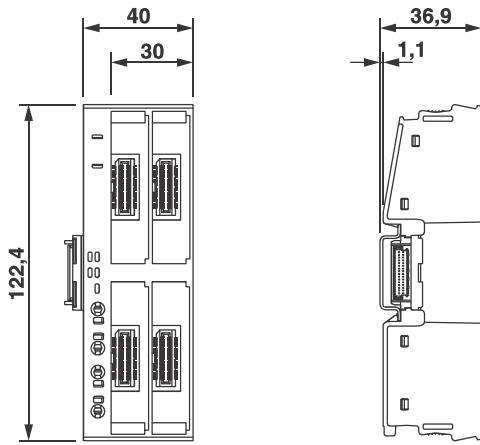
Nominal dimensions of the AXL F BP SE4
